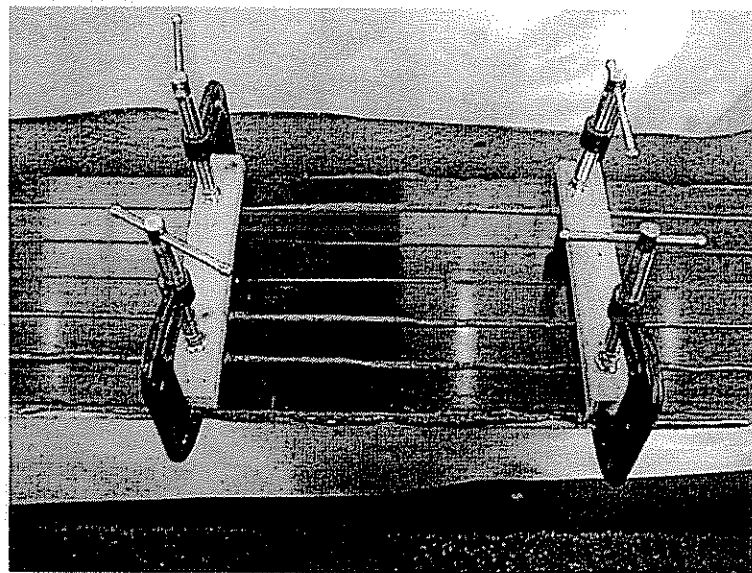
Close-up of adhesive squeezing out between composite strips and on the edge of the assembly indicating adequate adhesive at the interface to fully bond the adherends.
